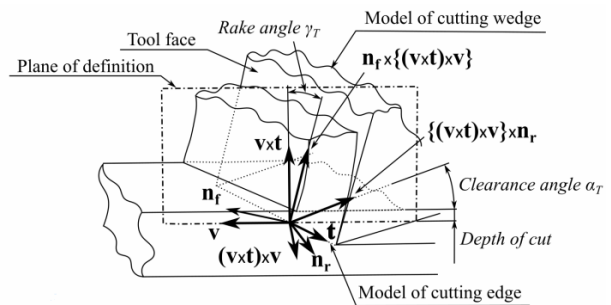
Oblique cutting model for defining cutting tool parameters.
